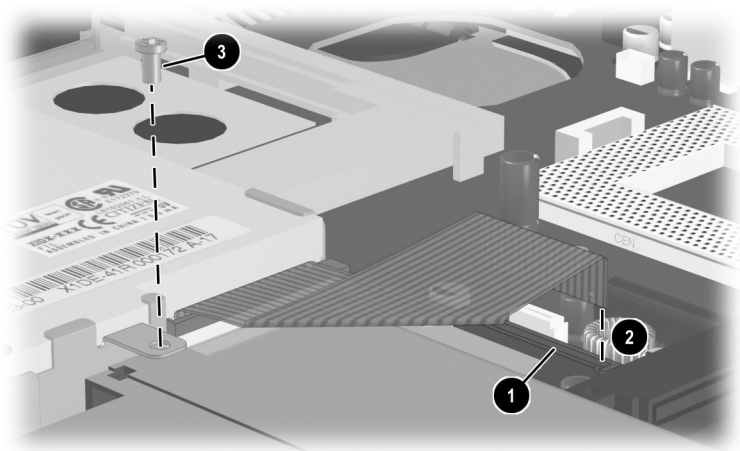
Disconnecting the Diskette Drive Cable and Removing the Diskette Drive Screws
